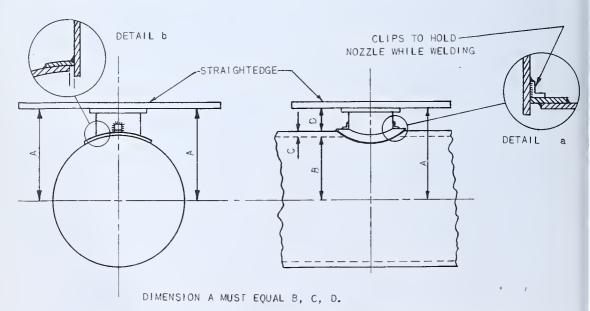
Leveling and Welding the Manhole Nozzle in Place
